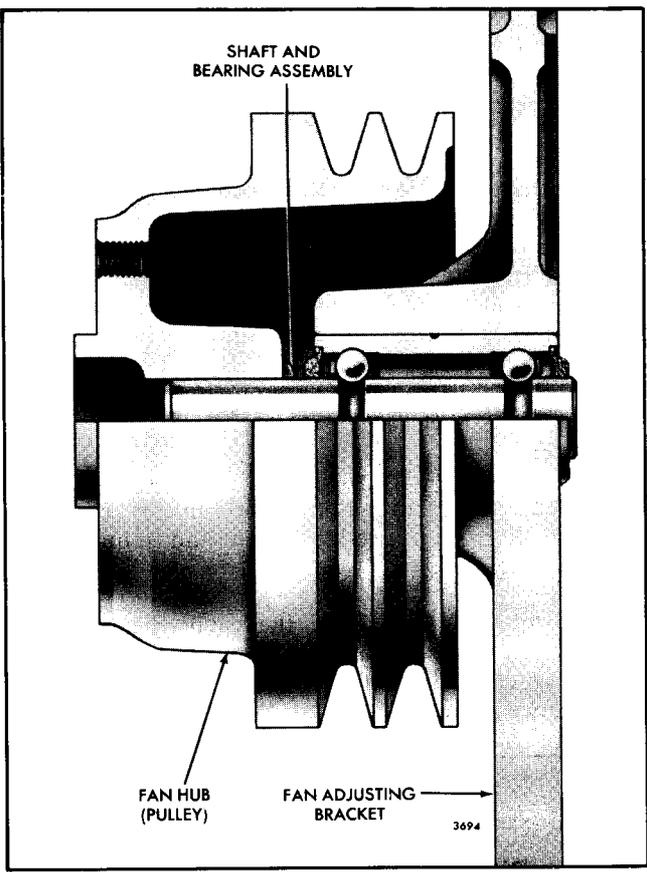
Ball Bearing Type Fan Hub Assembly (In-Line Engine)
